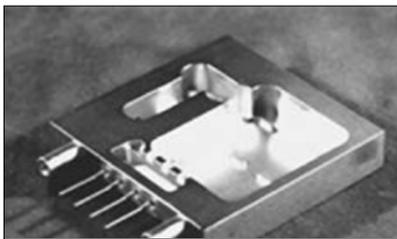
Metal Injection Moulded RF housing (Courtesy Raytheon Corp)
